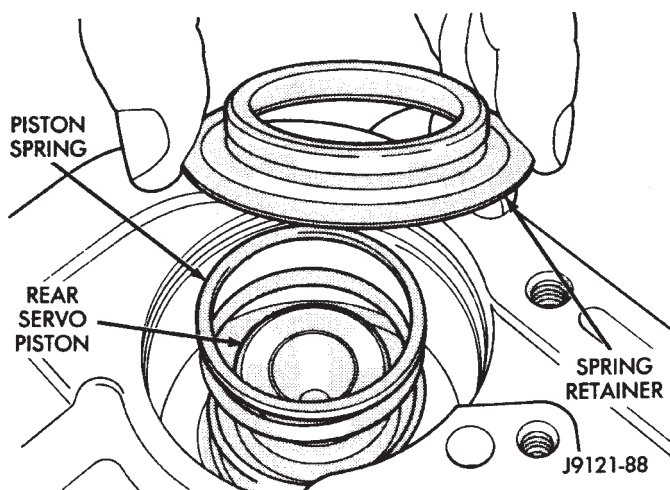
Rear Servo Piston Spring And Retainer Installation
